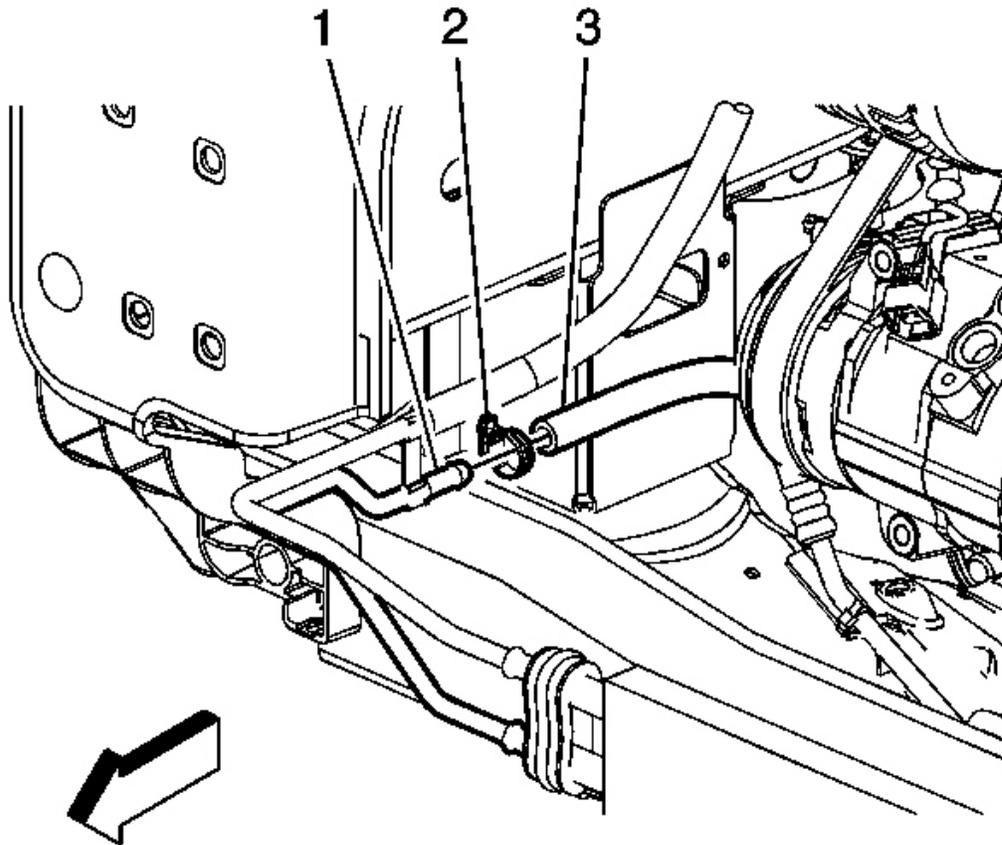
Identifying Power Steering Fluid Cooler, Power Steering Cooler Pipe & Clamp
